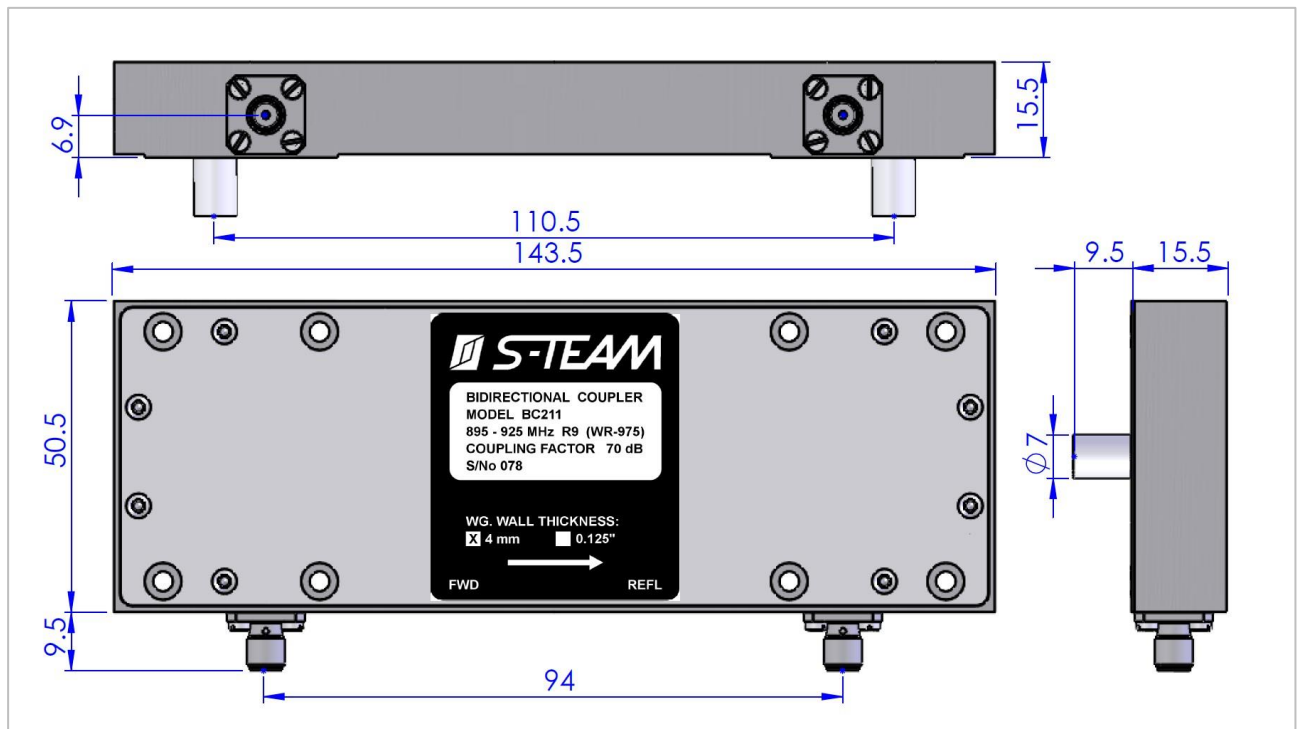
Basic BC211 dimensions. All dimensions are in millimeters.
